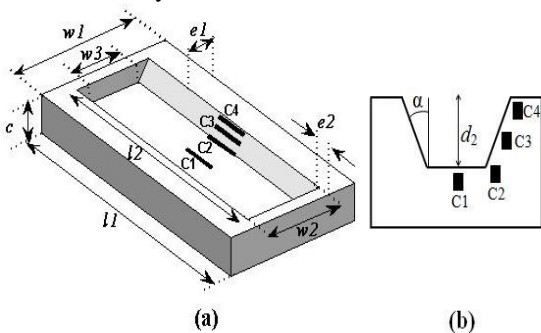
(a) 3D test piece with cracks positions. (b) Transversal cross section test piece with cracks positions.
